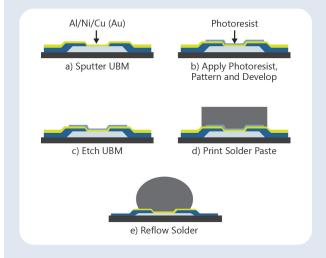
Printing Technique (with Al/Ni/Cu (Au) UBM and any kind of solder alloy available as solder paste).
